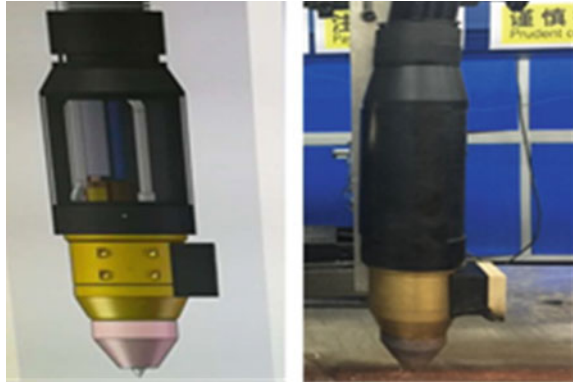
Experiment system of laser deep TIG hybrid welding
